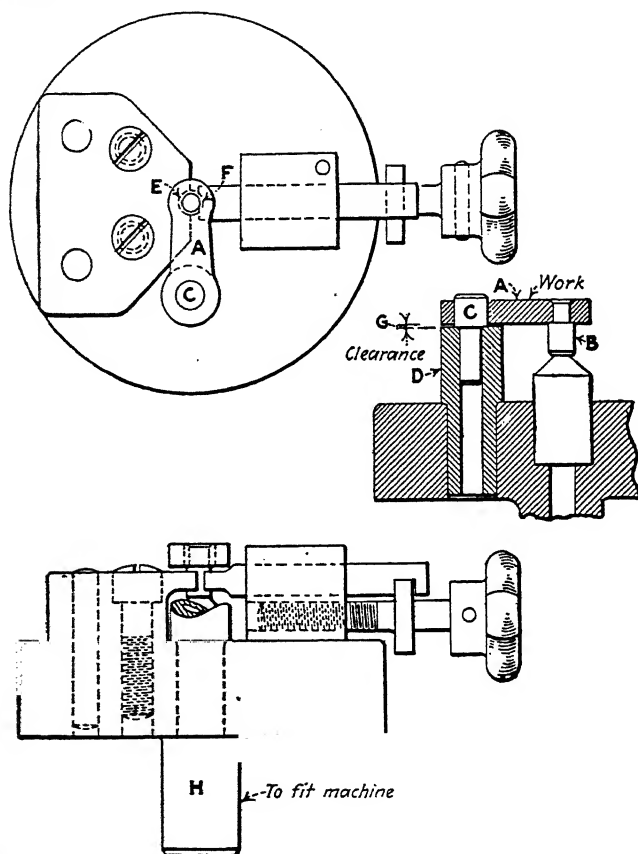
Riveting Fixture Showing Methods of Locating and Clamping
